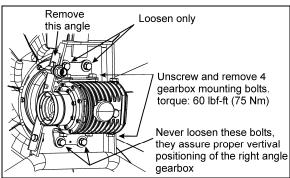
RIGHT ANGLE GEARBOX MOUNTING 05126
